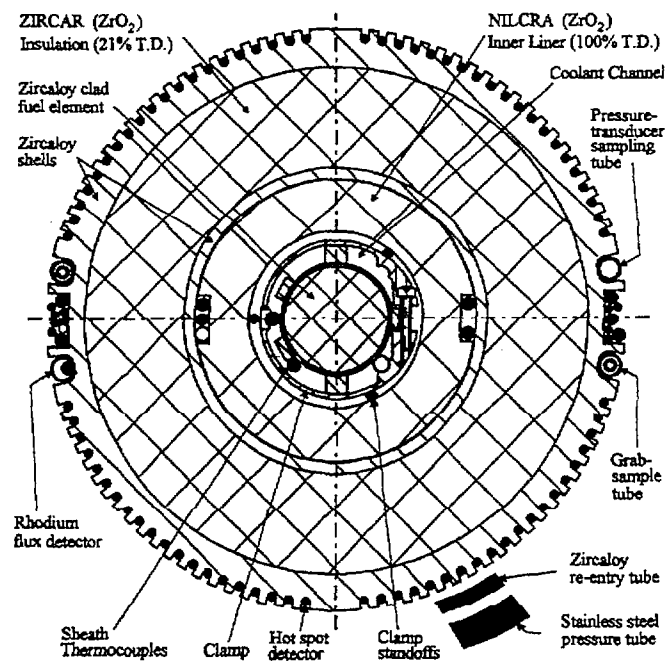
Cross Section Through the BTF-105A Test Assembly at the Fuel Element Midplane
